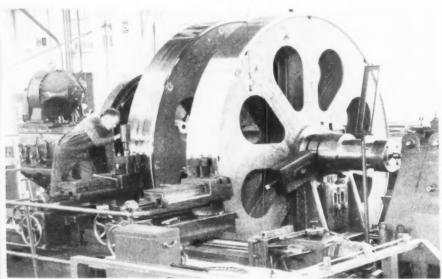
Wheels for ship-propulsion bull gears must be accurately aligned and machined to tolerances as close as three ten-thousandths of an inch. Here the final stage of a lathe operation is shown. A machinist is inscribing a "target patch" on the wheels. This is to indicate the location of a line only 0.003 inches wide that is used for lining up the helixes in the hobbing that follows.
